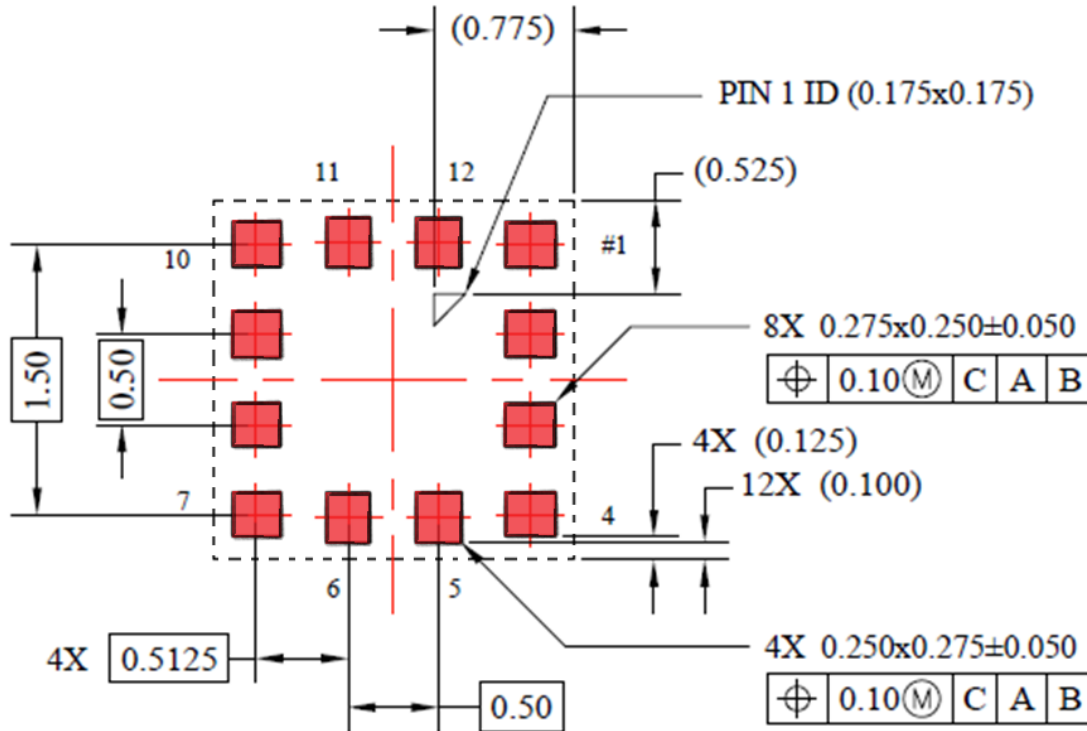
Example of a 12-pin 2 x 2 mm LGA in a multilayer PCB
